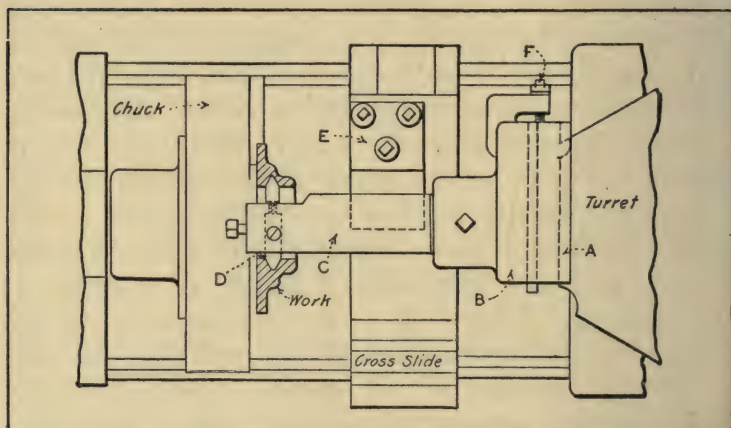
RECESSING TOOL FOR TURRET LATHE
